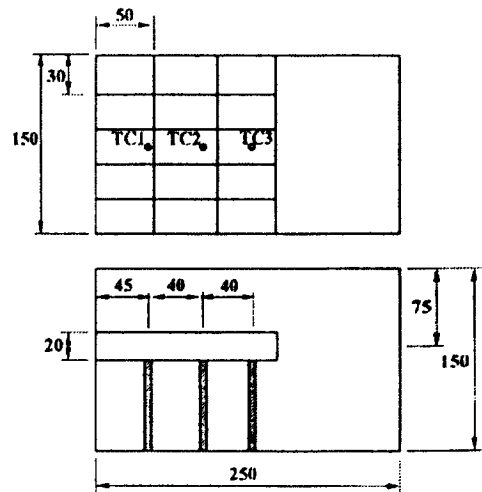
Geometrical drawing of the specimen and position of thermocouples.
